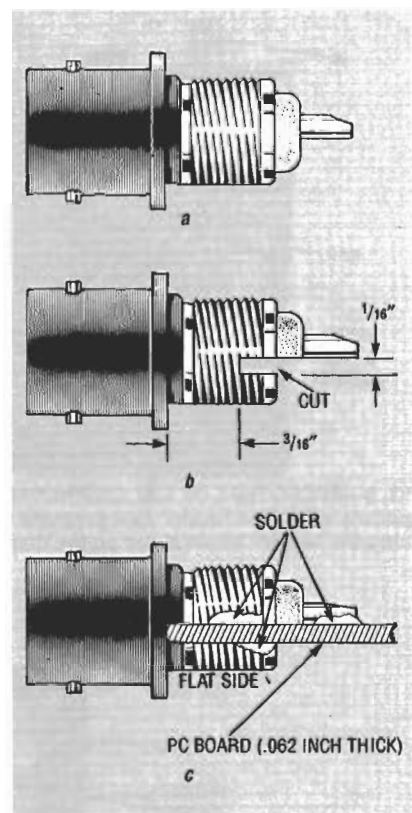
BNC SOCKET MODIFICATION for the cabinet-mounted version. In (a) a side view is shown of a female BNC panel-mount socket. In (b), a slot is cut in the threads with a hacksaw or file. In (c), the slot fits snugly over its PC board notch. Solder it on both sides of the PC board; the center pin goes on side A.
